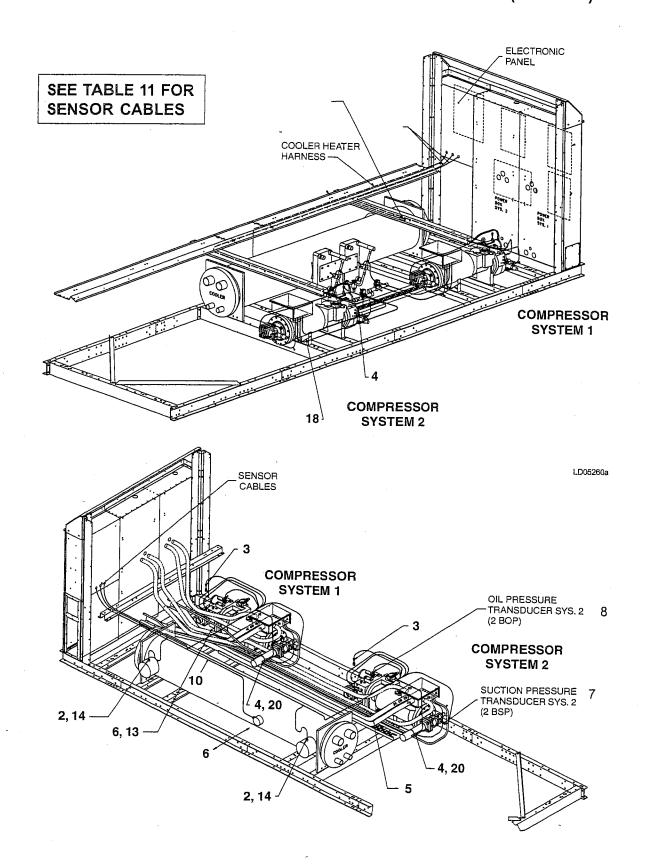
COMPRESSOR AND CONTROL COMPONENTS (REF. TABLES 8, PAGE 25)
